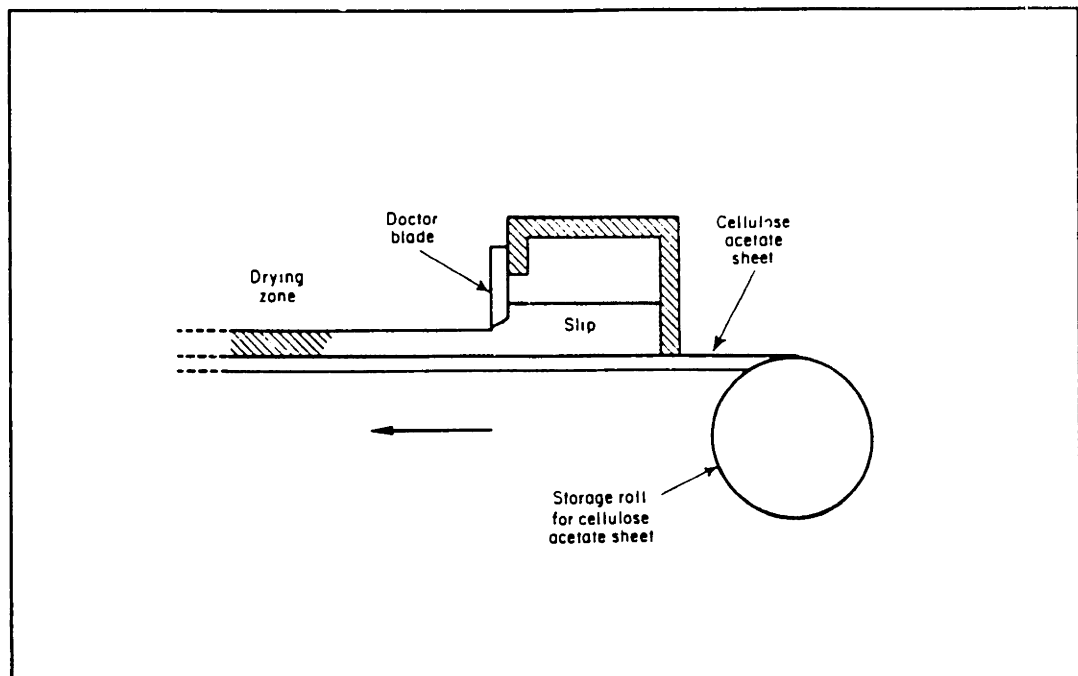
A schematic view of the tape casting process [Mistler, 1978].
